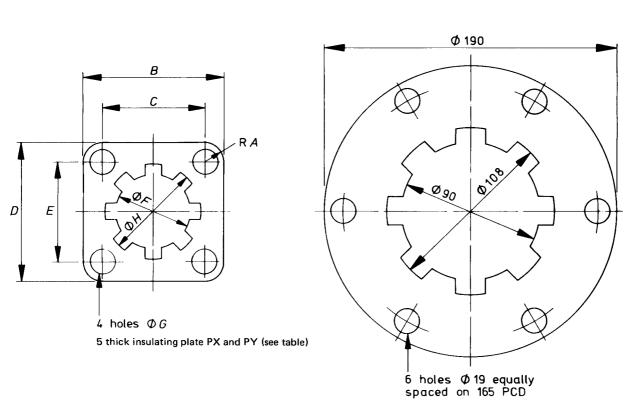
Moulded insulator for gland assembly types C2 and D2
